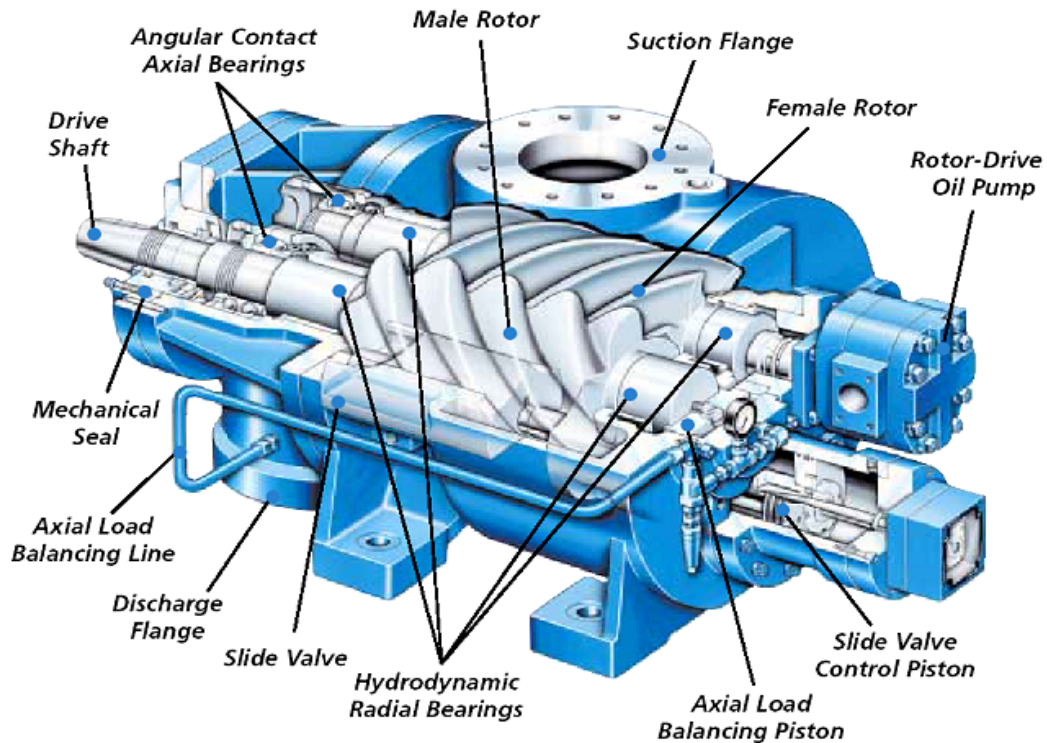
Isometric cutaway drawing of Twin-Screw compressor [4]
